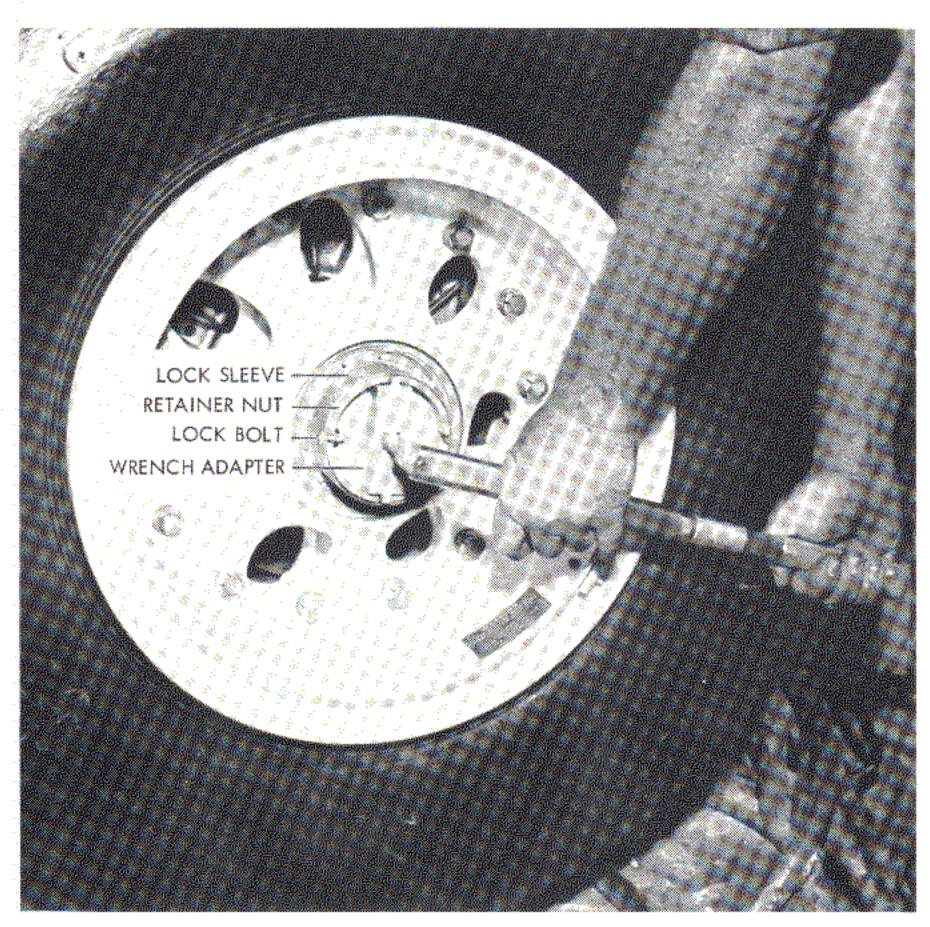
After Torqueing Retainer Nut and Bolting it to Sleeve, Use Retainer Nut Wrench to Prove That Nut Cannot be Unscrewed, Then Apply Alternating Torque to Ensure That Tangs Have Full-width Engagement.
